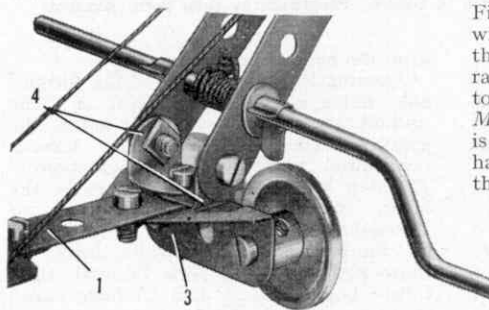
A close-up view of the wheel assembly of the Radial Crane.
